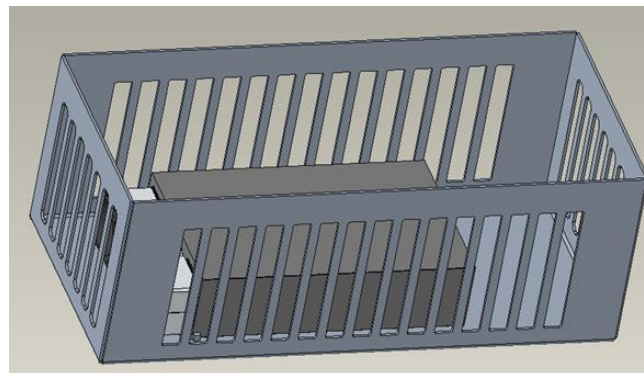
The placement of Heat-Sink inside the Initial Version of the Module Housing.
